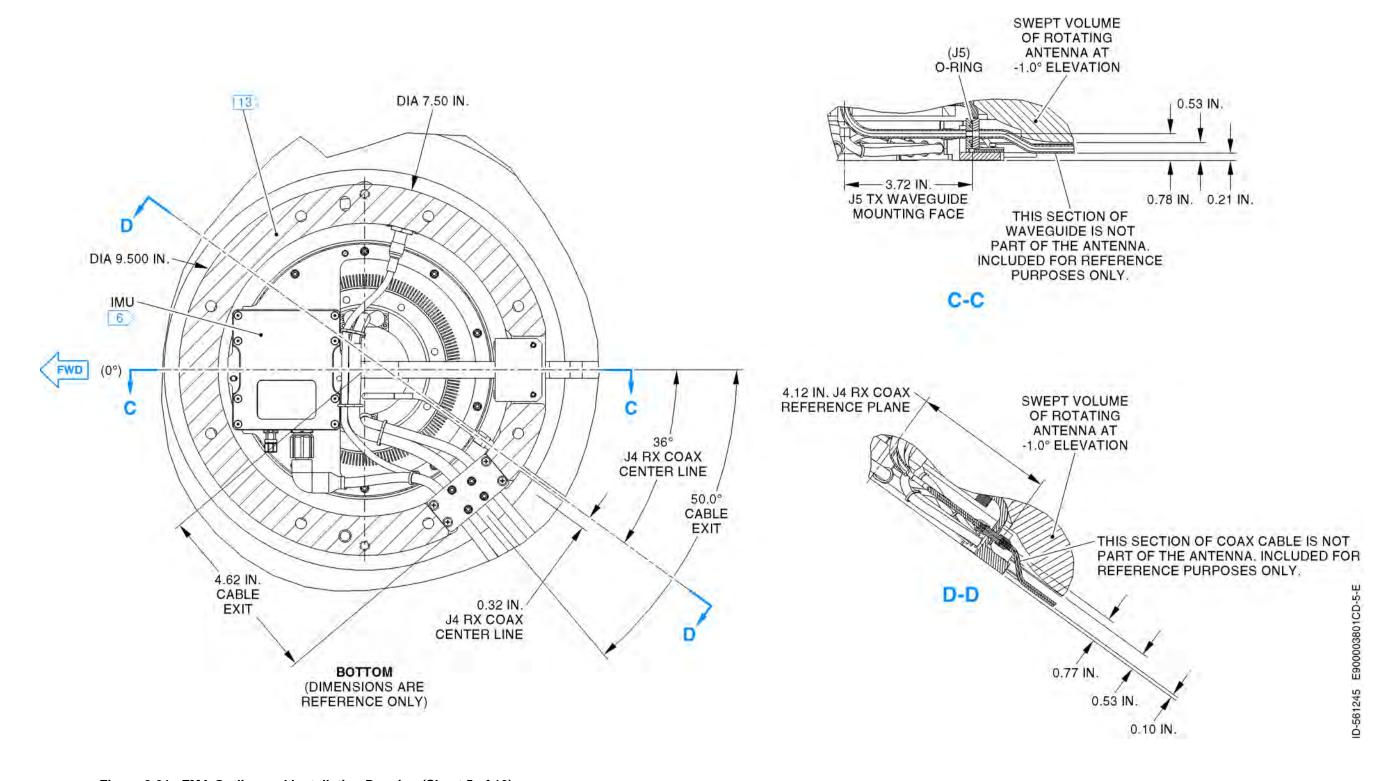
FMA Outline and Installation Drawing (Sheet 5 of 12)
